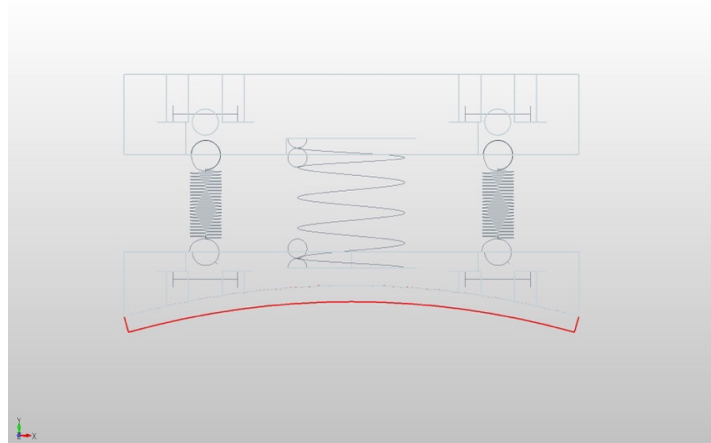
CAD design of engagement pad. The springs were purchased as standard products from McMasterCarr.
